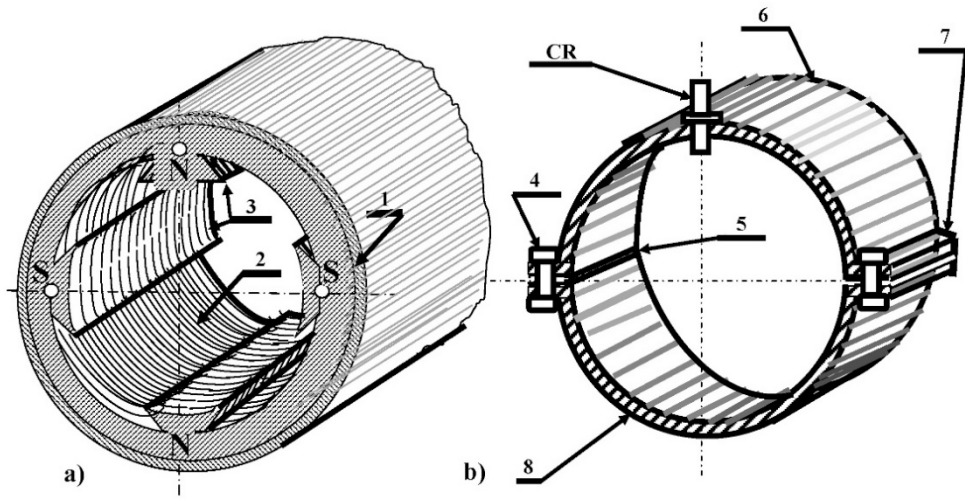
Compared geometry of electrical generator stator pole pieces with a turbine engine compressor body: a) silicon sheet of the generator rotor core package: 1 – cylindrical cast-steel body, 2 – silicon sheet package, 3 – stator pole pieces, b) turbine engine compressor inlet diffuser body: CRL – reluctance sensor (inside in the engine body), 4 – “shoulder” screw mounted in the calibrated orifice holes of both engine body halves, engine body pitch plane, 5 – body pitch plane, 6 – engine body upper half, 7 – engine body orifice (upper body half), 8 – engine body lower half.
